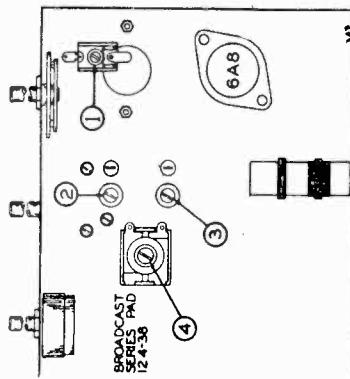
BOTTOM VIEW SHOWING TRIMMERS
